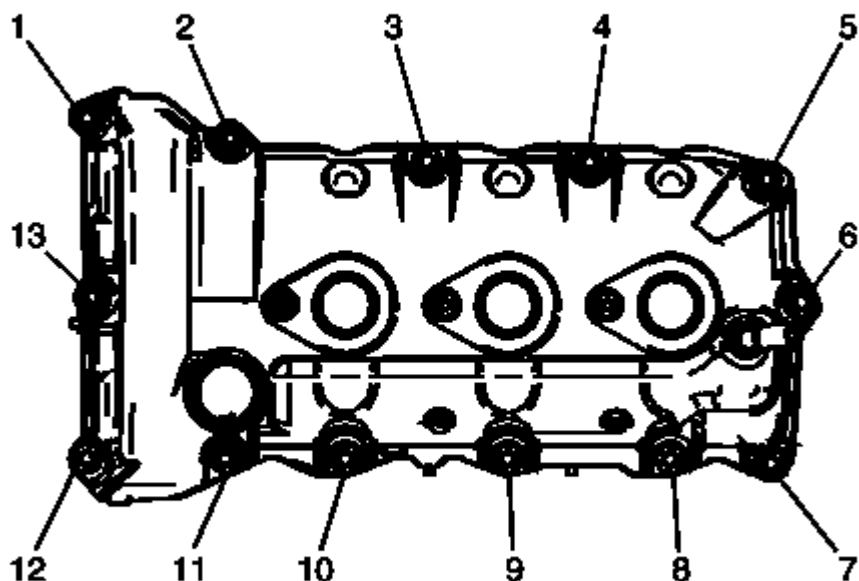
Identifying Left Camshaft Cover To Cylinder Head Retaining Bolt Tightening Sequence
